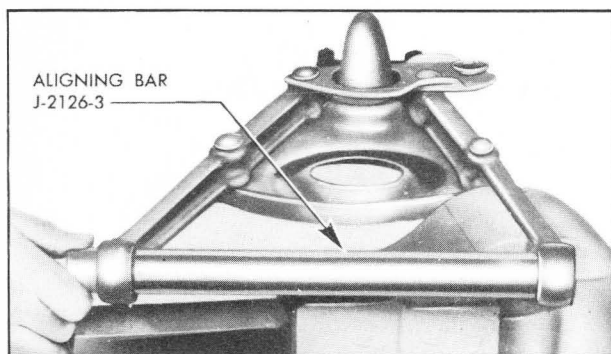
Checking Alignment of Control Arm Inner Ends
